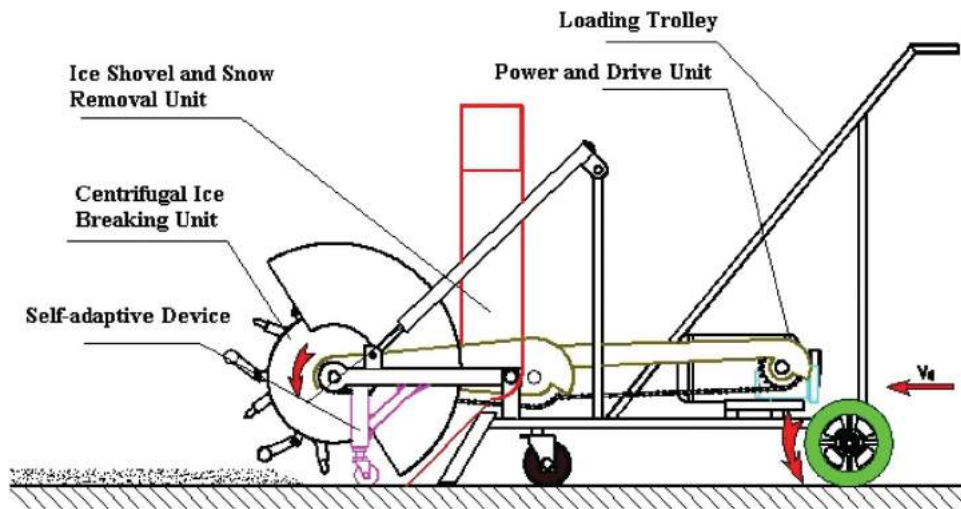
Schematic Drawing for Prototype of Centrifugal Ice Breaking and Snow Removal System.
